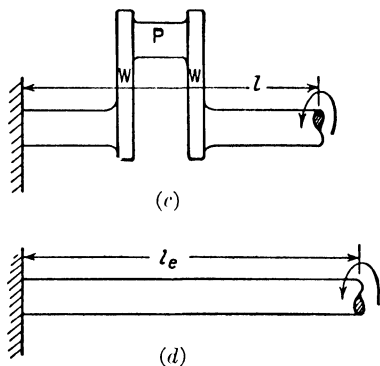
and d.—A crank of length l is replaced by a piece of uniform shaft of length l_e having the same torsional flexibility.
